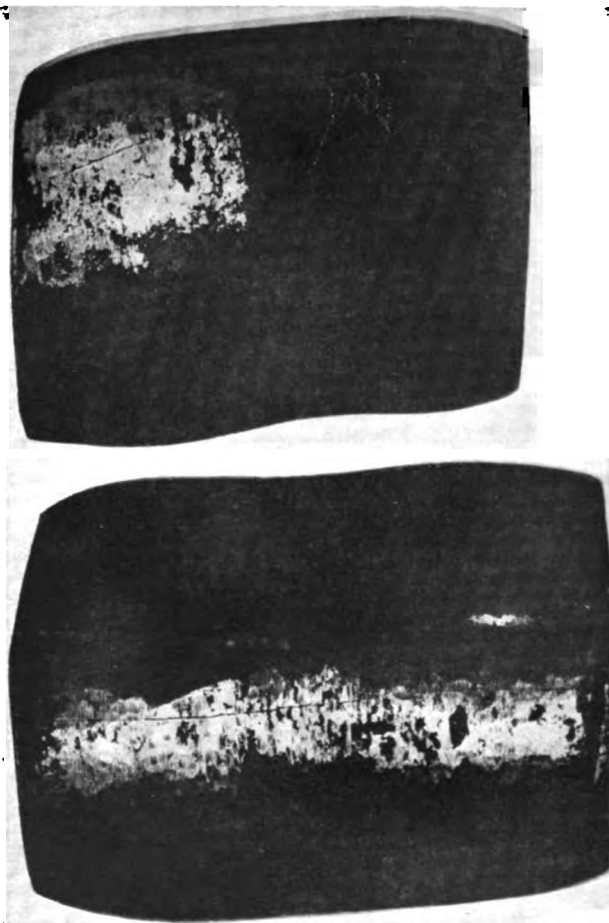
BILLETS OF ALLOY STEEL CONTAINING TYPICAL EXTERNAL LONGITUDINAL FLAWS.
